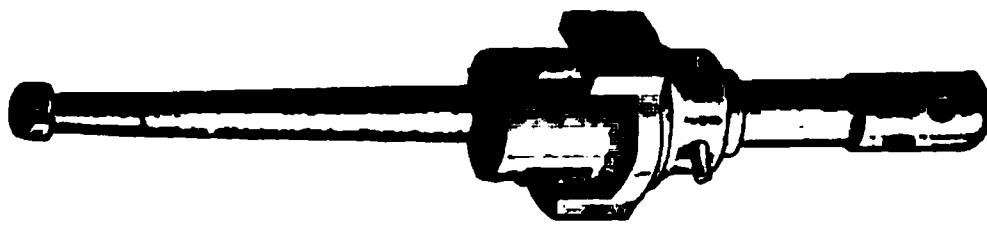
The Dudgeon Boiler Flue Expander, as used for making expanded joints on the flues of large boilers.
